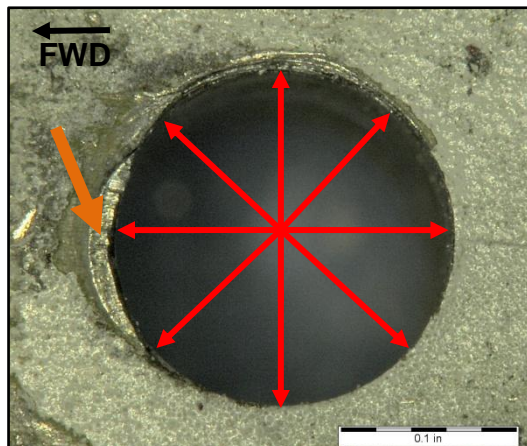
The inboard trim tab attachment hole located in the brown square in Figure 10.
